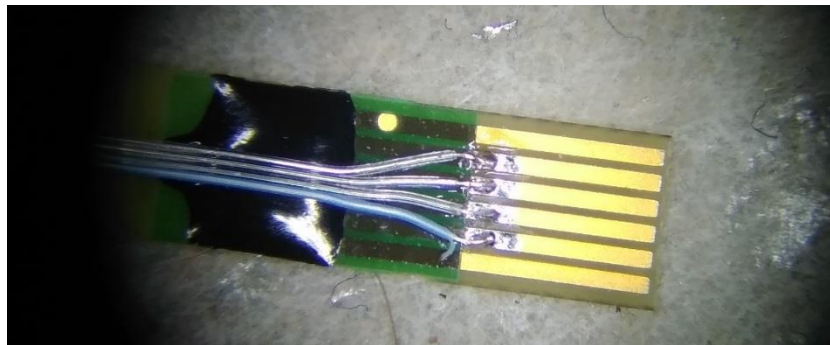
shows an example of the PCB Flex connector, where the colored VSS wire can be easily seen.
